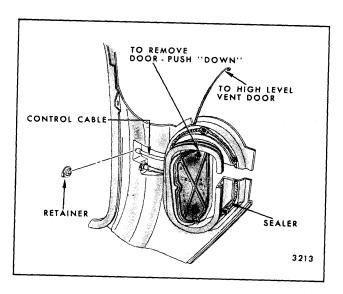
Shroud Side Finishing Panel Sealing - All Styles Except "E" and "Z-67"
